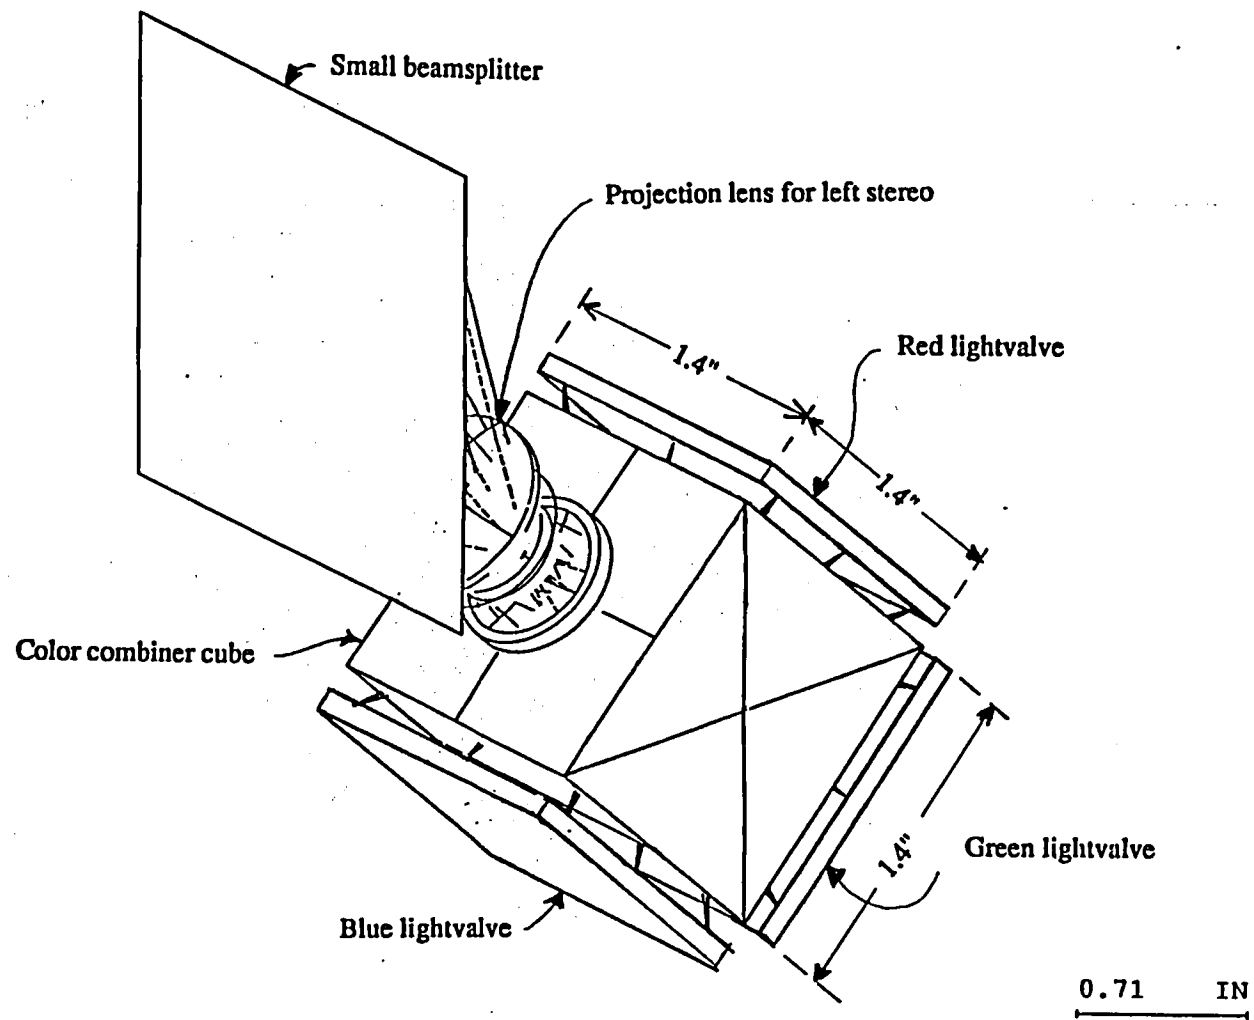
Left Stereo Color Projection Lens Assembly.
